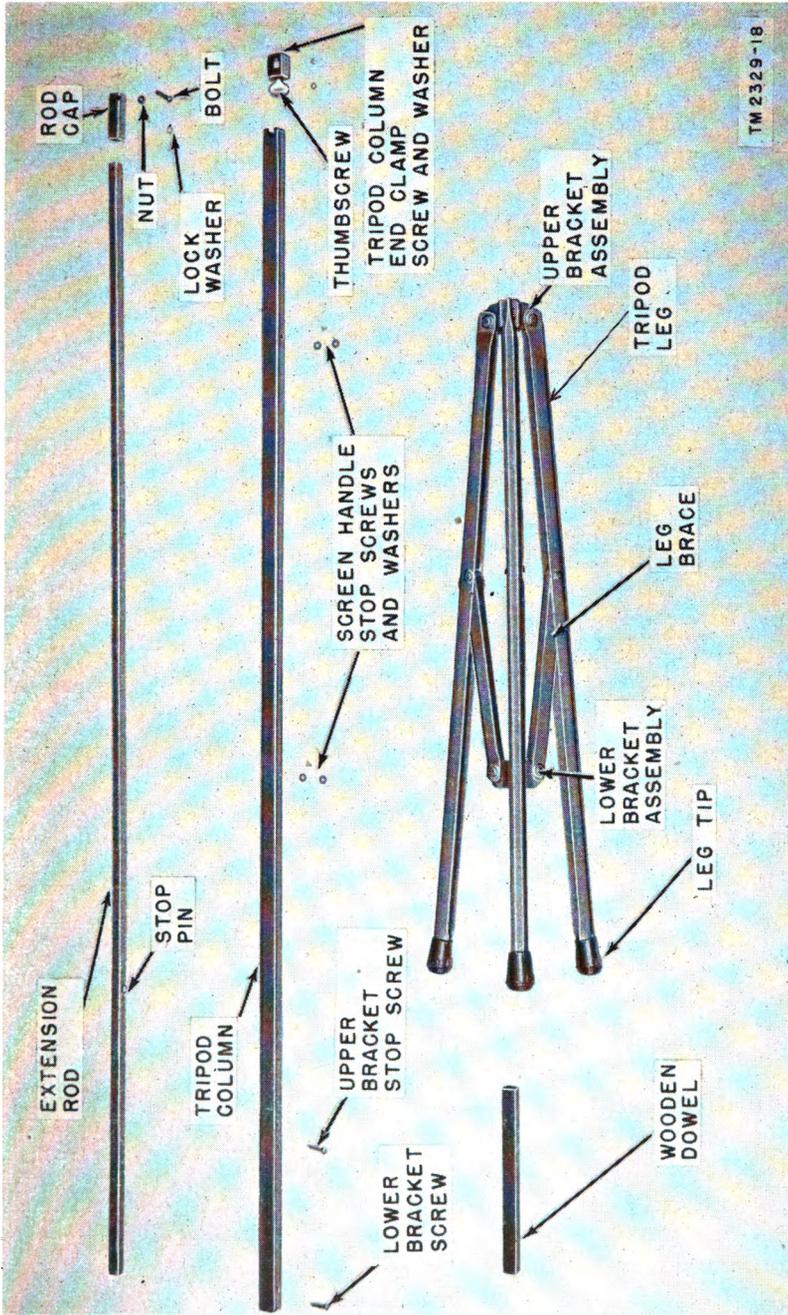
Screen PH-358-D, tripod assembly disassembled.
